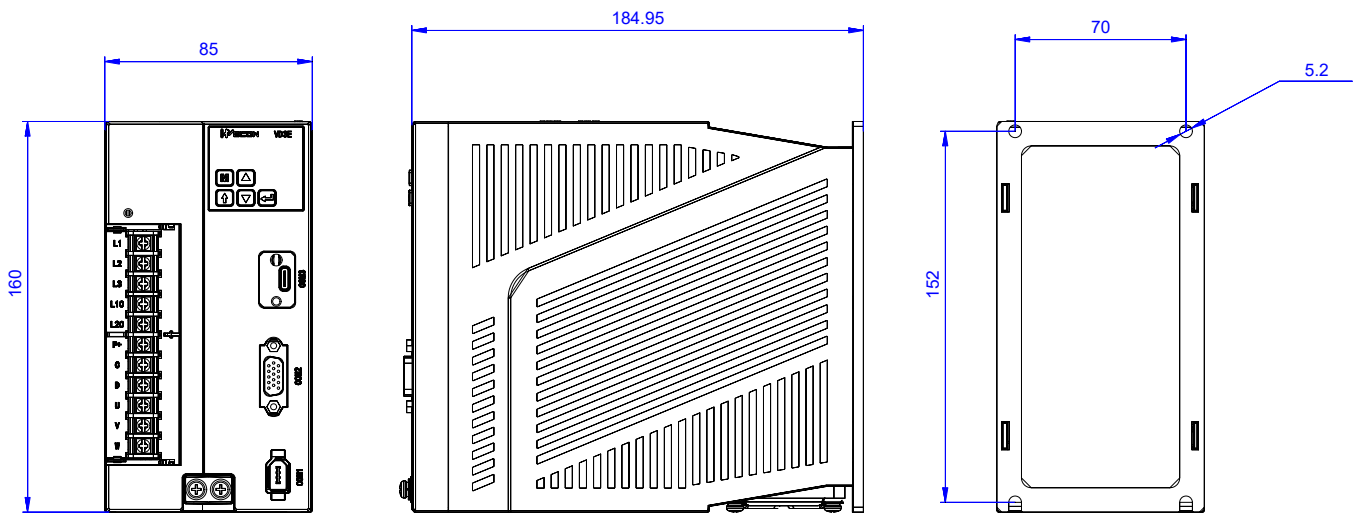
Installation Dimensions of VD3E Type B Servo drive
